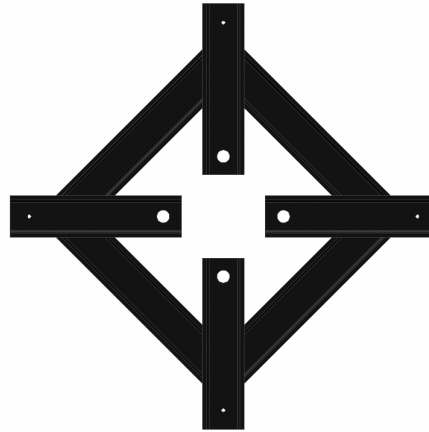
Welded Steel Channel Iron. Angled pieces of channel iron are welded to straight pieces so that the rotor is rigid. This welded channel iron is then welded to the steel sheet that the magnets are attached to.
